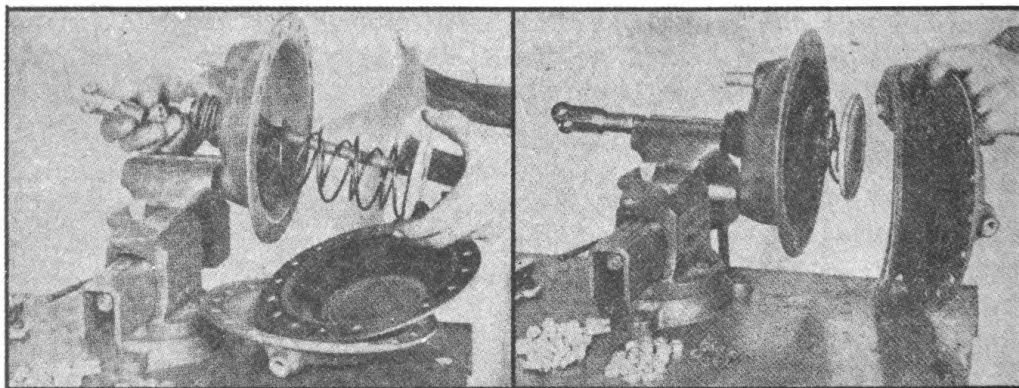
BRAKE CHAMBER DISASSEMBLED
